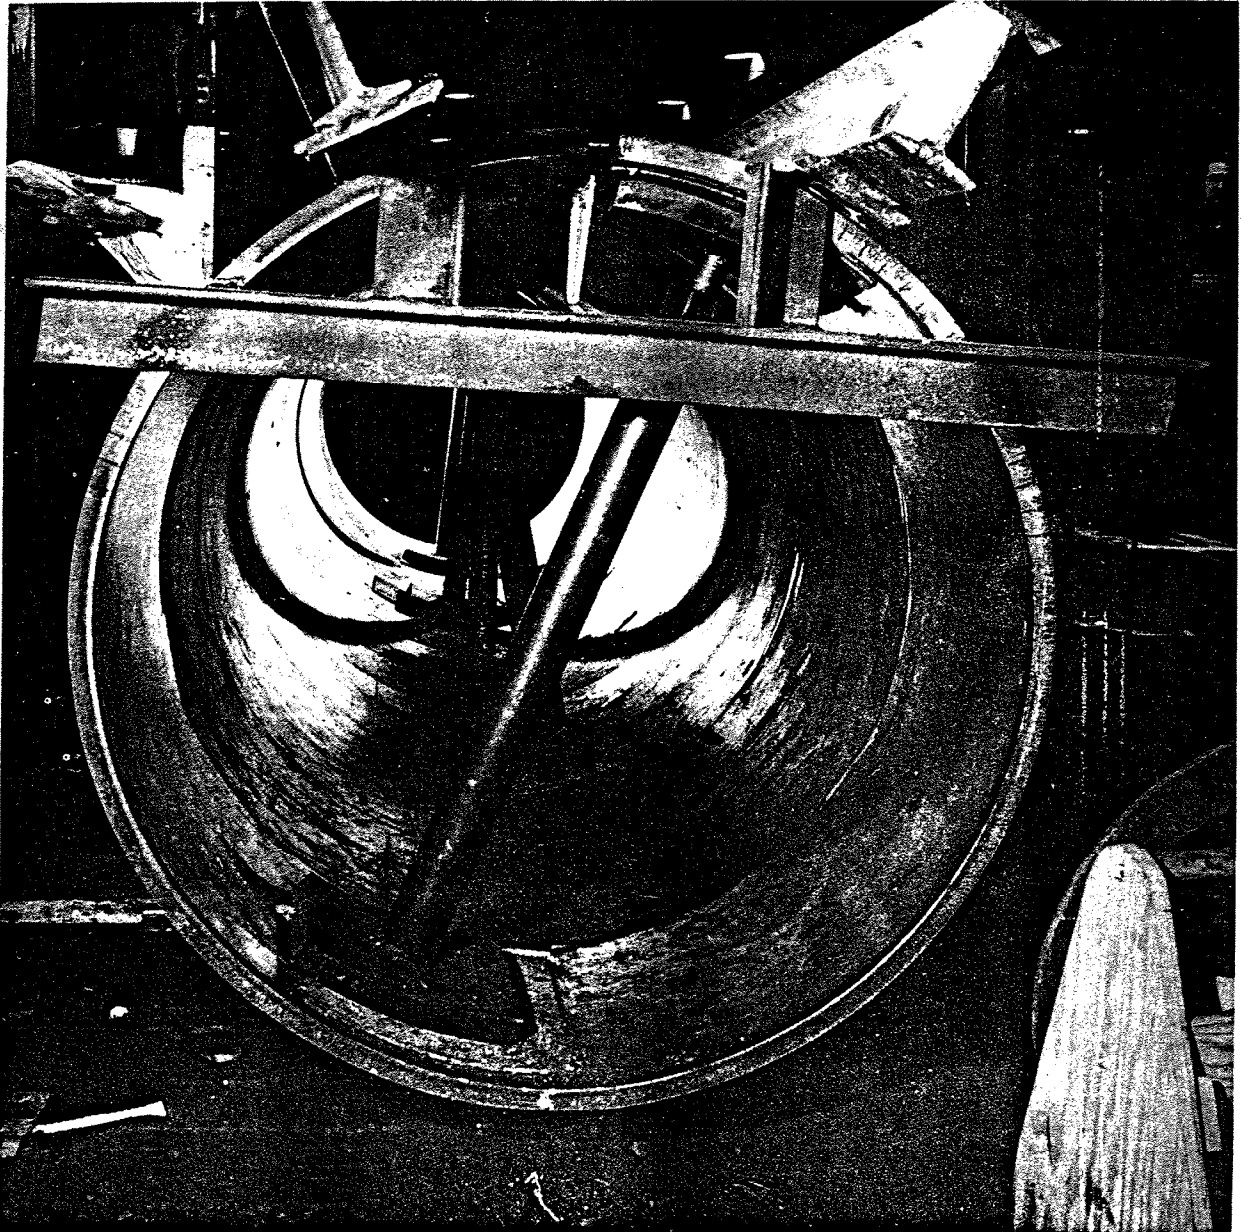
b.2 Preparation of cylinders for welding.
